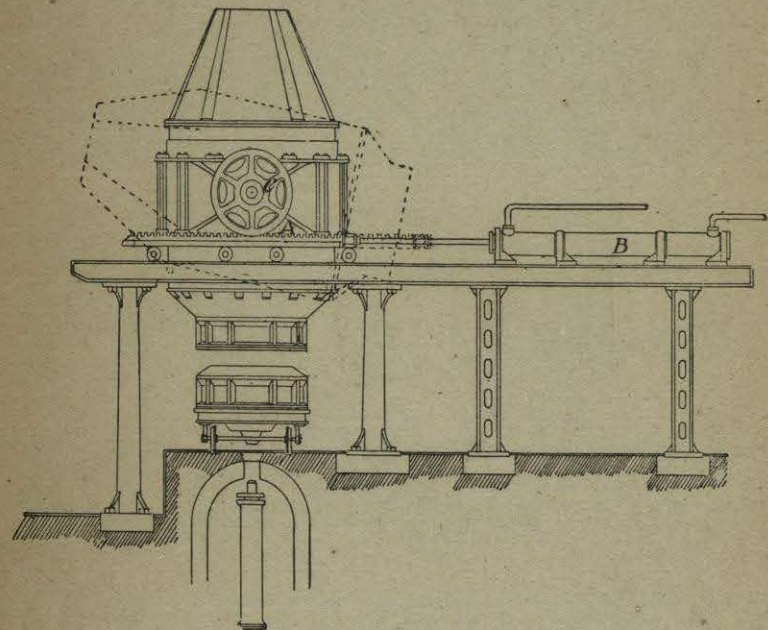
Method of Rotating Converter by Hydraulic Rack.—A, Rack ; B, hydraulic cylinder ; C, pinion.
